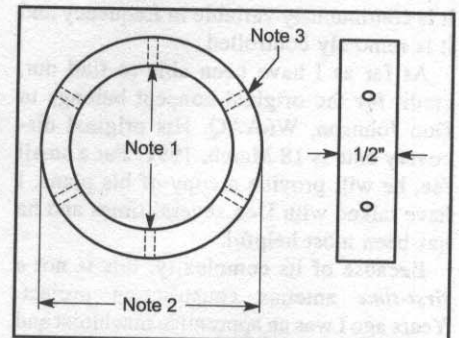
Machined ring used to secure screwdriver assembly. Note 1: Bore for a snug fit on your screwdriver motor. Note 2: Turn the OD for a loose fit in the base pipe, typically 1.970 inches. Note 3: Drill six holes no. 36 and tap 6-32, evenly spaced on the periphery of the ring. Equip every other hole with a 6-32  $\times$   $\frac{1}{8}$ -inch socket head setscrew. The remaining three holes accept the 6-32 round head screws that anchor the ring to the base section.
